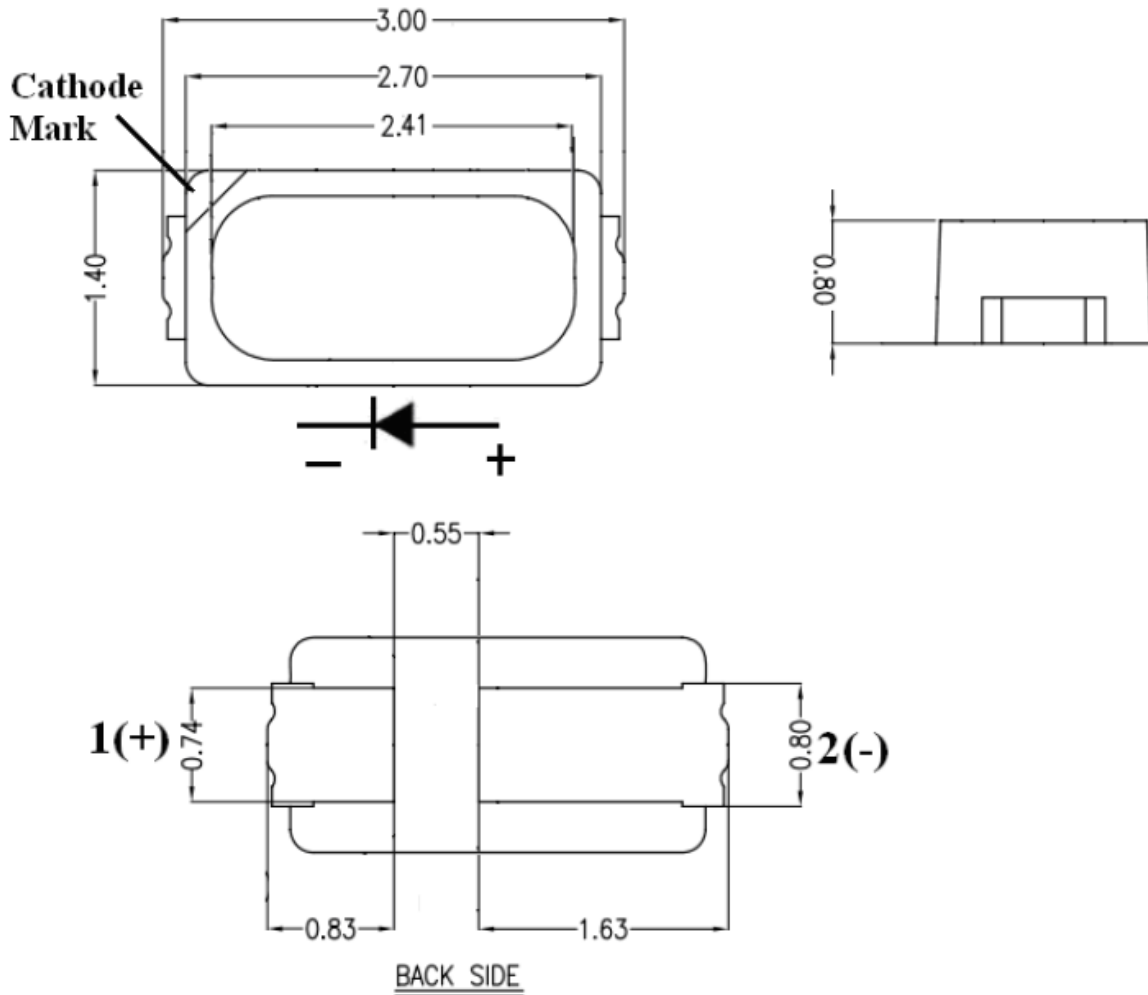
Mechanical drawings of the 3014 package (all dimensions in mm)
